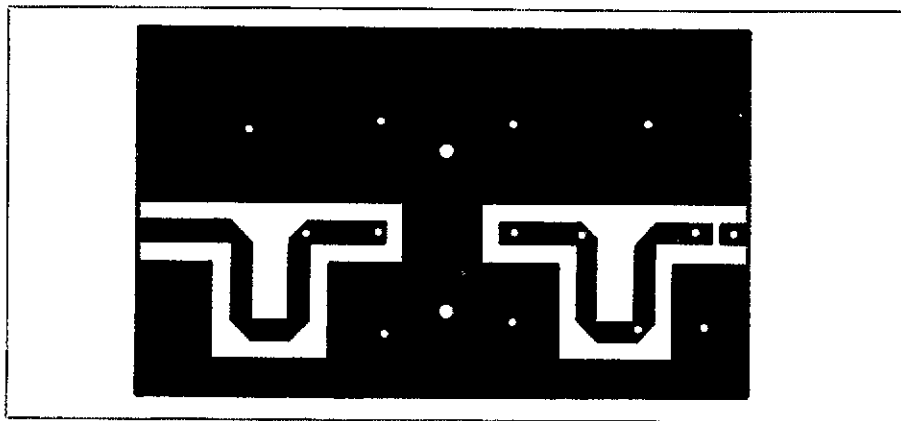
This scale drawing of the pc-board layout can be used to make a pattern for etching the board. The width of the strip-line inductors should be held very closely to 0.112 inch for best match between the transistor and 50 ohms. Material is double-sided G10 (glass-epoxy) board.
